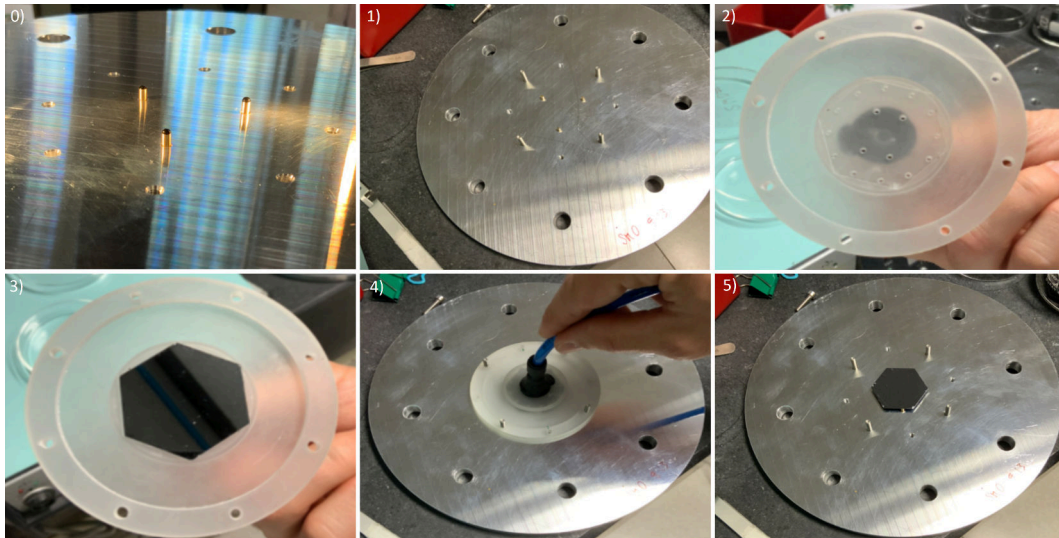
0) Picture of the interface flange, where the 3 bonding cylinders are visible. Steps of placing a test specimen. 1) Flange ready with 4 screws for centering. 2) 3D printed mechanism with hexagonal housing and vacuum holes. 3) Test specimen held by the mechanism. 4) Centering with turning off the vacuum to place sample on cylinders. 5) Sample mounted and centered.
